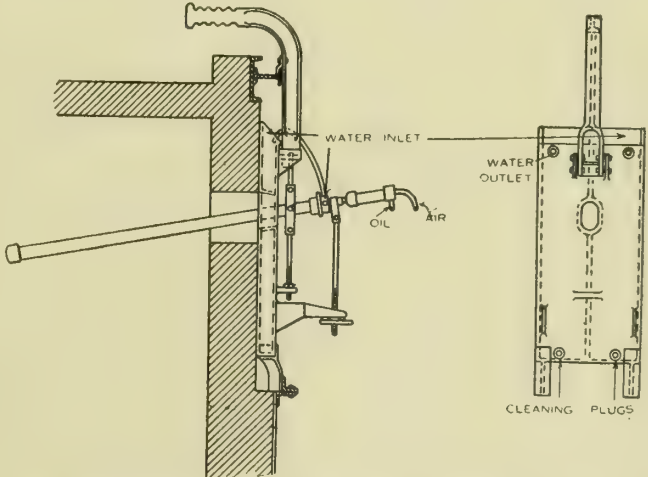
WATER-COOLED FUEL OIL BURNERS ATTACHED TO OPEN-HEARTH FURNACE.
